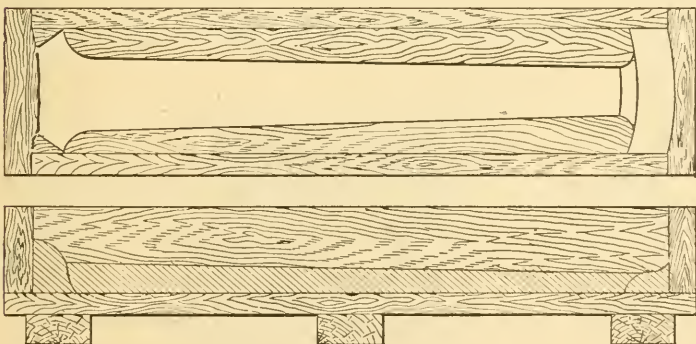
PLAN AND SECTIONAL SIDE VIEW OF THE ARM CORE BOX.
